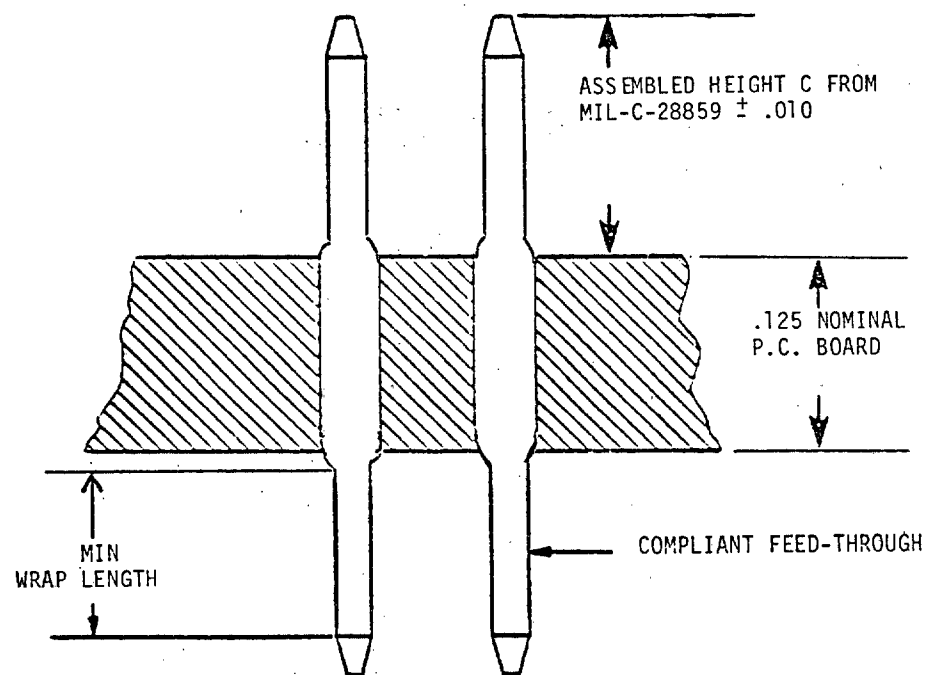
Cross-sectional view of printed-wiring electrical backplane assembly. - Continued.
